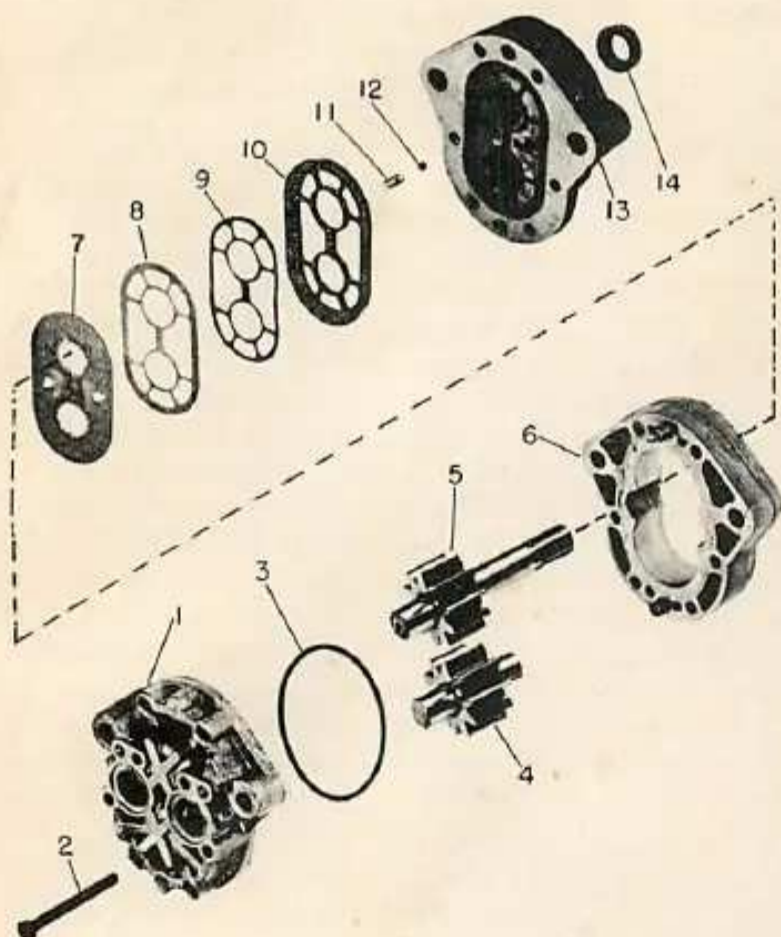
Exploded view of the hydraulic pump assembly. Check ball (12) and spring (11) are used on early Series 1600 pump assembly only.
